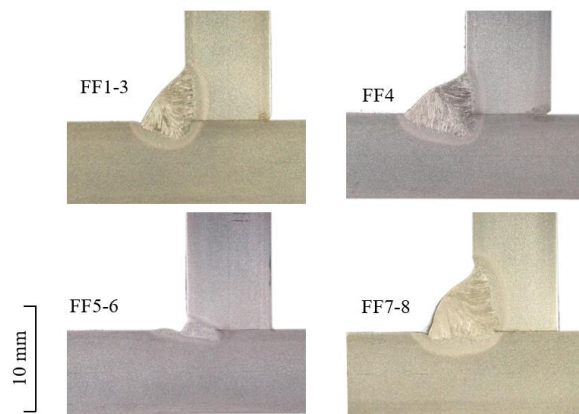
Macrographs of the web-to-flange connections in the hollow section specimens.
